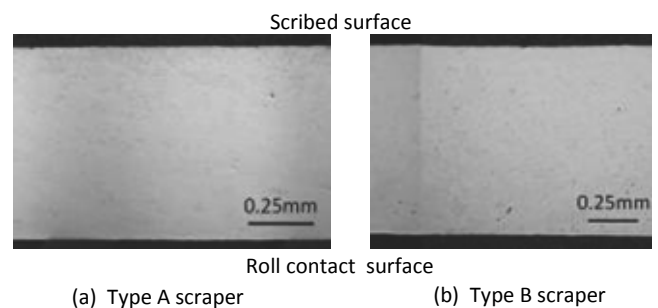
Cross sections of the strip cold rolled down to 1 mm
